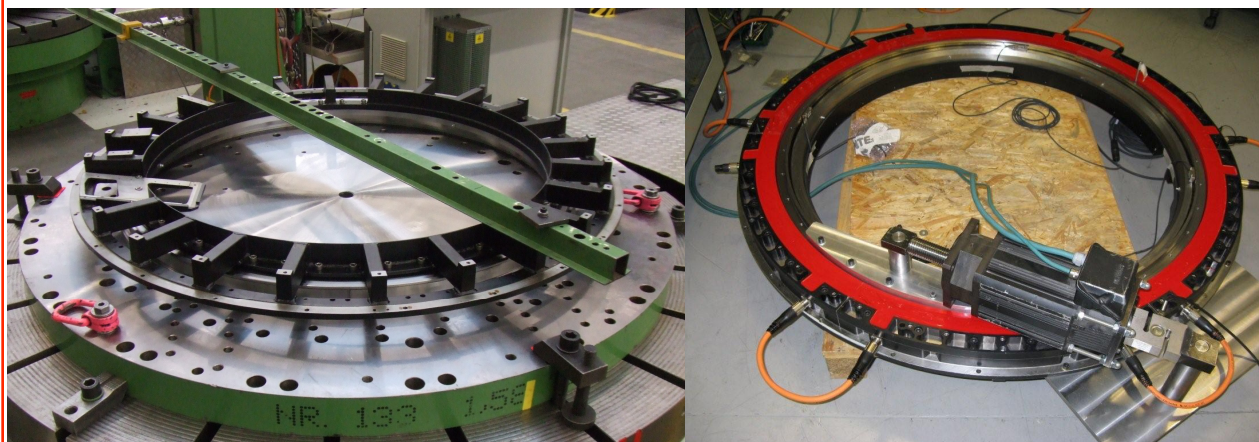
Left: the large bearing allowing co-rotation of the WFS assembly with the telescope pupil in order to keep the WFS pointing on the laser sources. The motorization of the assembly on the bearing is provided by a linear drive motor (right) and dedicated encoder (Phase Motion Control – Heidenhain). NTE Sener (Spain) is responsible for the manufacturing of the GRAAL Main Assembly.
